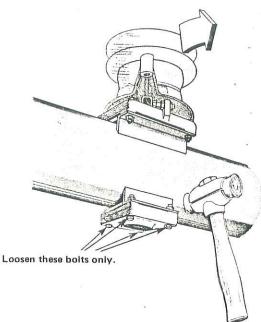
Figure D — Tap the lower bearing housing in the same direction the insulator is leaning. For example, in figure B in which the stack is leaning toward the left side of the picture, tap the housing in that direction to tilt the stack back to perpendicular, which is to the right of its present centerline.
